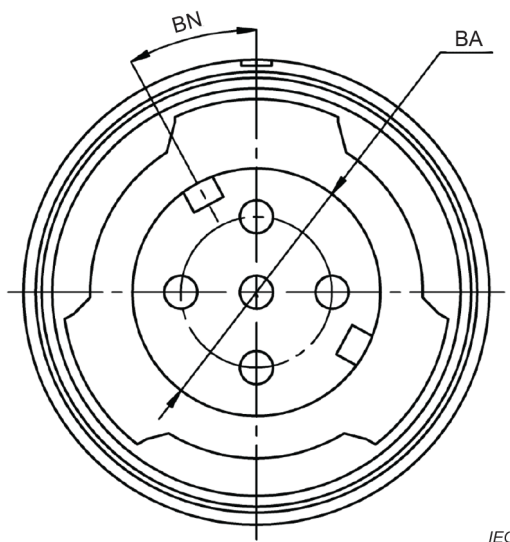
Front view of the female side of the push-pull housing for P-coding
